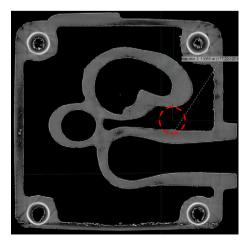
Reconstructed cross-section of the micro-CT images, showing the internal structure of the Audi/NSU single cylinder engine's cylinder head (top view). The position of the pressure sensor between intake and exhaust port is indicated by the dashed circle
